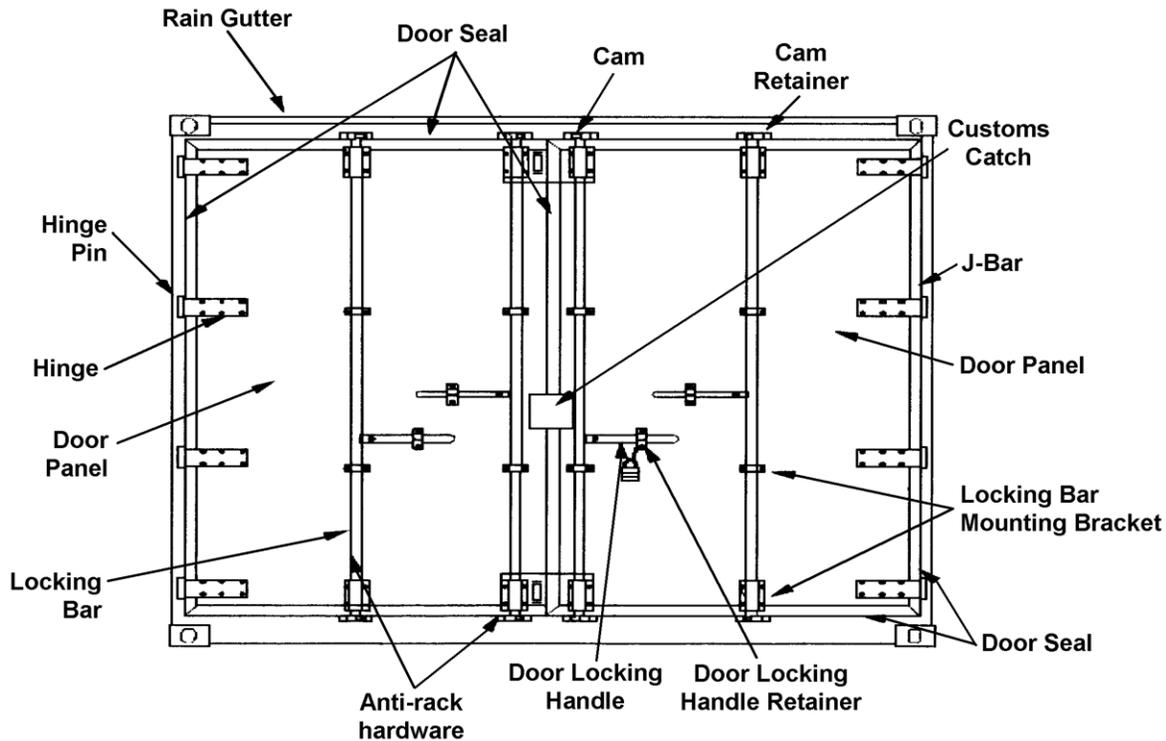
Rear End Door Assembly with Customs Catch Plate
